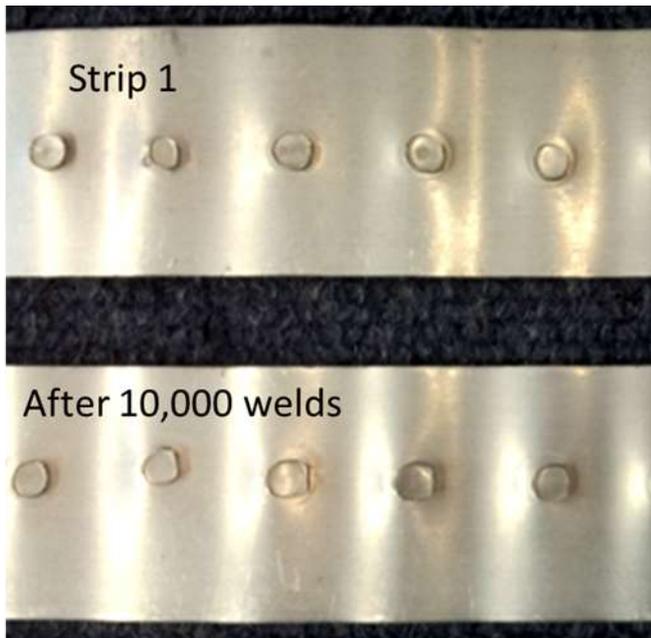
The nuggets of RSW welded aluminium strips showing joint consistence with the automatic electrode buffing.
